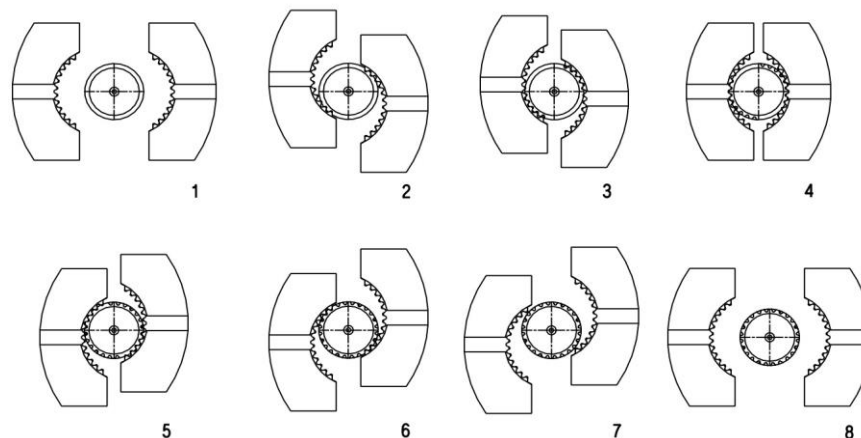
WPM - Motion Principle Rolling Tools / Workpiece
